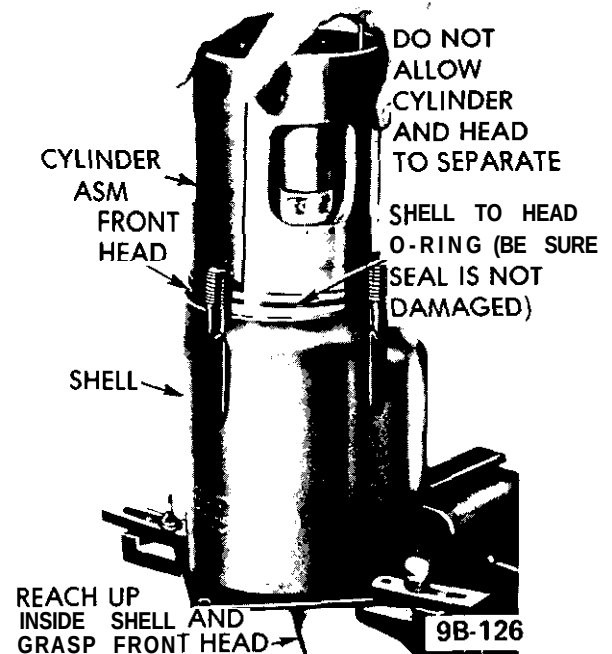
B-126 Installing Front Head and Cylinder Assembly in Shell
